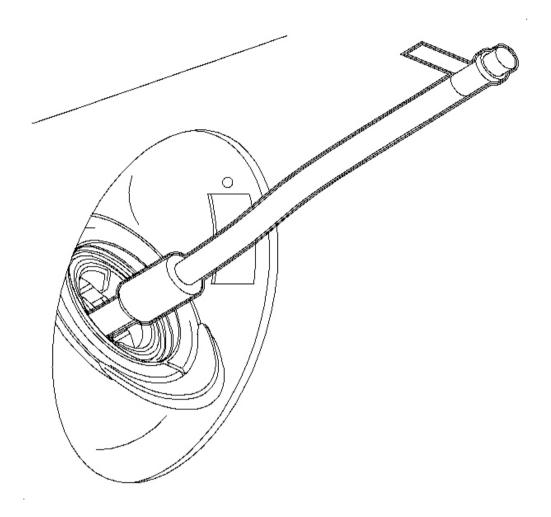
View Of Siphon Hose Guide/Funnel Courtesy of GENERAL MOTORS CORP.
